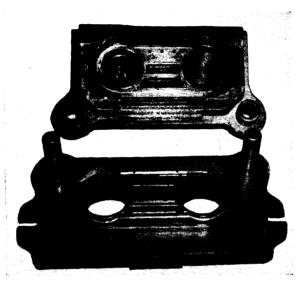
Single type of overhead trim die and punch. The only finish machining that is necessary on such a die is at the trim line and at those locating points at which the casting may be distorted.
